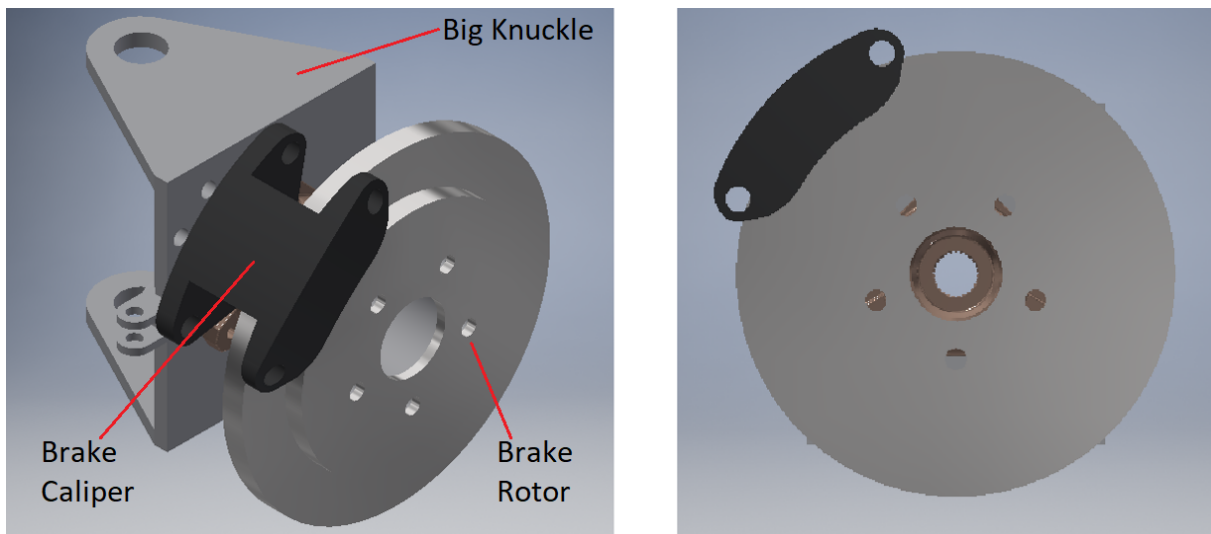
Initial assembly of caliper and brake rotor w.r.t. feasible location
